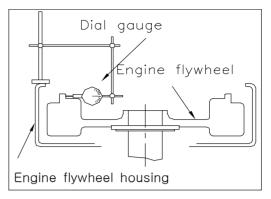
FLYWHEEL HOUSING CONCENTRICITY CHECKING
